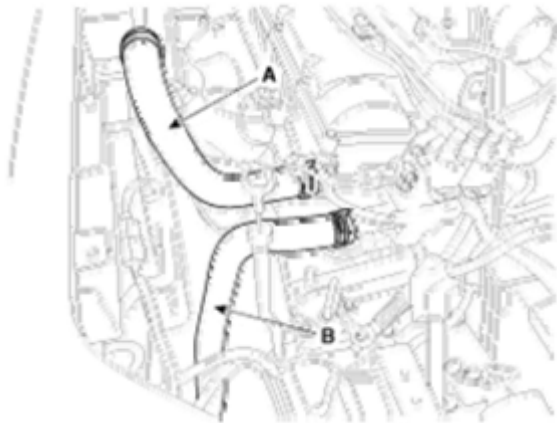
Identifying Upper Radiator Hose & Lower Radiator Hose
